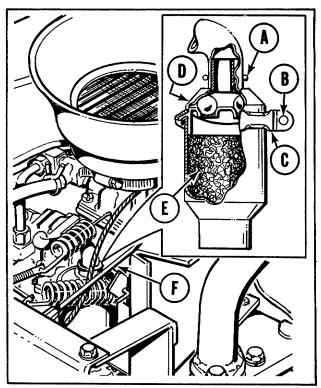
Crankcase breather valve and governor linkage located on top of engine.
